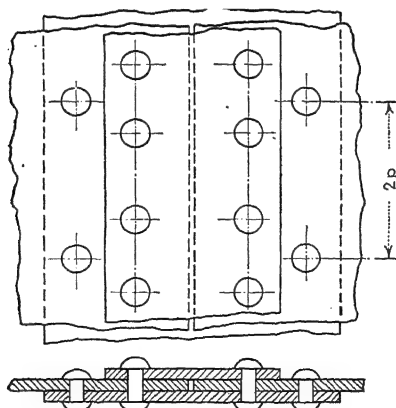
4.—Multiple-riveted butt joint, with two rows of rivets.
